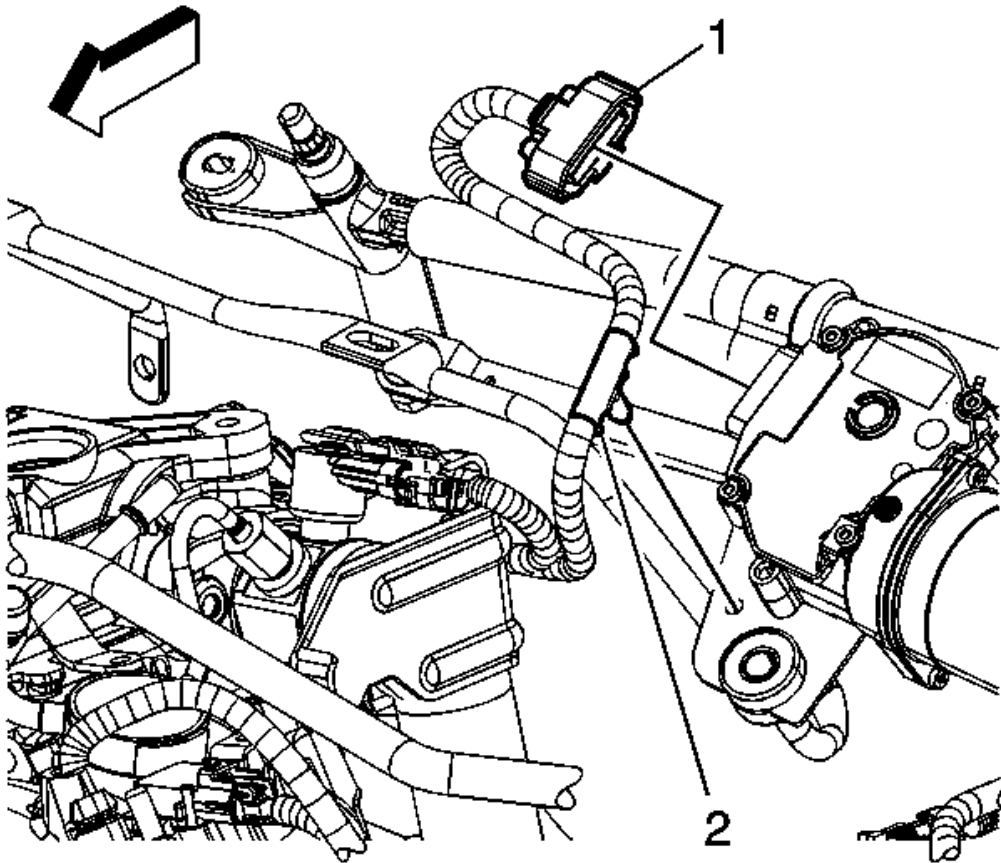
Locating Windshield Wiper Motor Electrical Connector & Harness Clip
